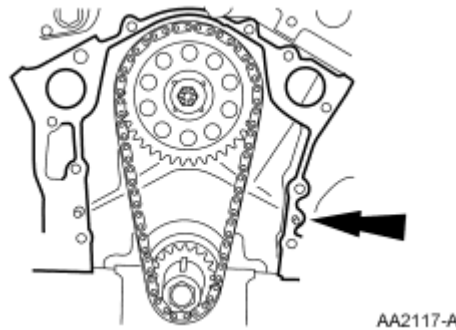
Using Plastic Scraping Tool To Remove All Traces Of Old Sealant
